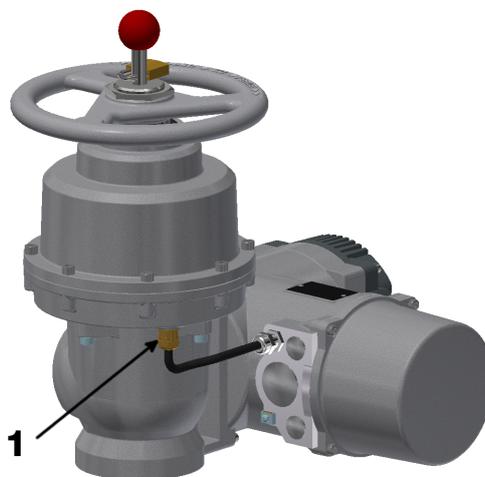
1...Cable gland on the failsafe assembly of the failsafe base actuator
